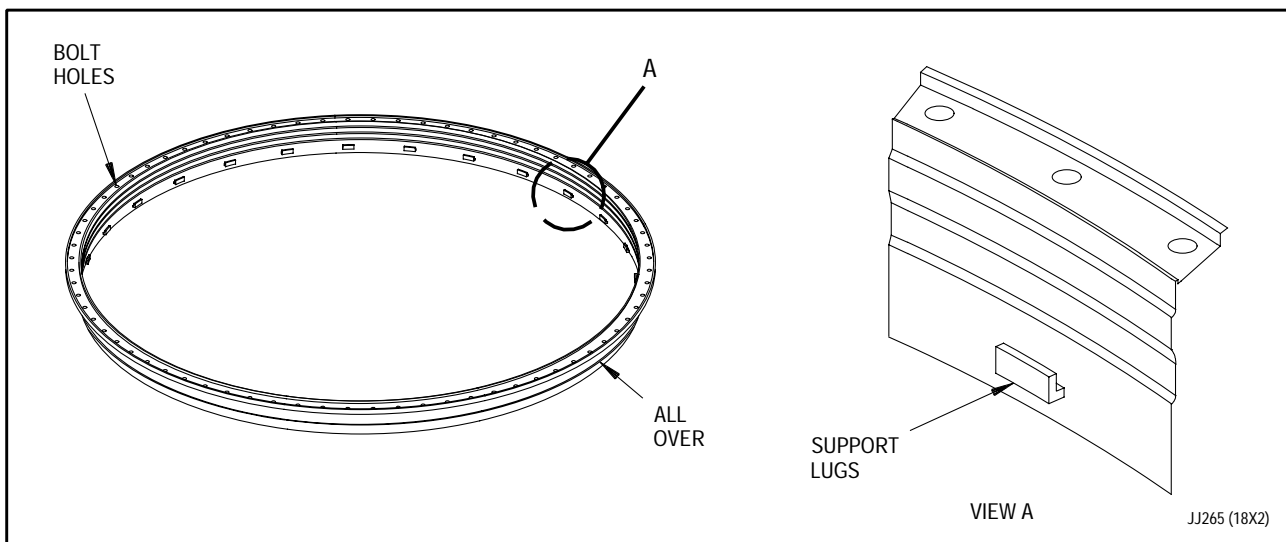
Fourth Stage Turbine Air Sealing Ring Support - Blend Repair
